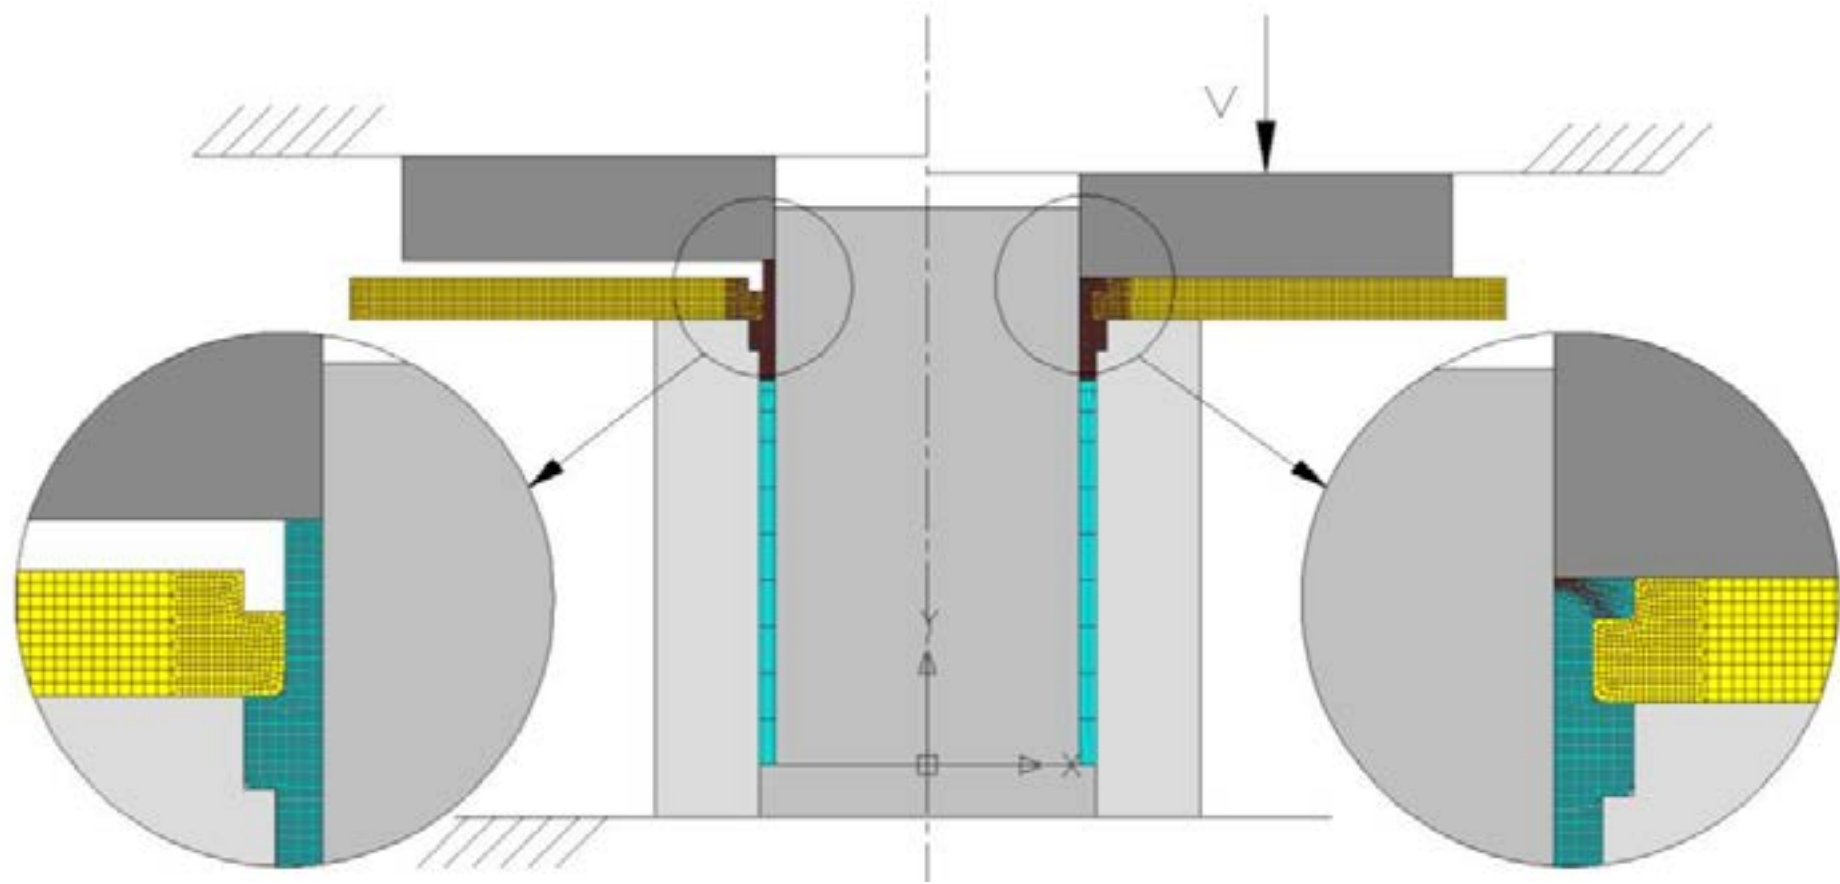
Finite element modelling of the second stage (mechanical interlocking) of the proposed joining by forming of tubes to sheets with counterbored holes at the initial and final instants.
